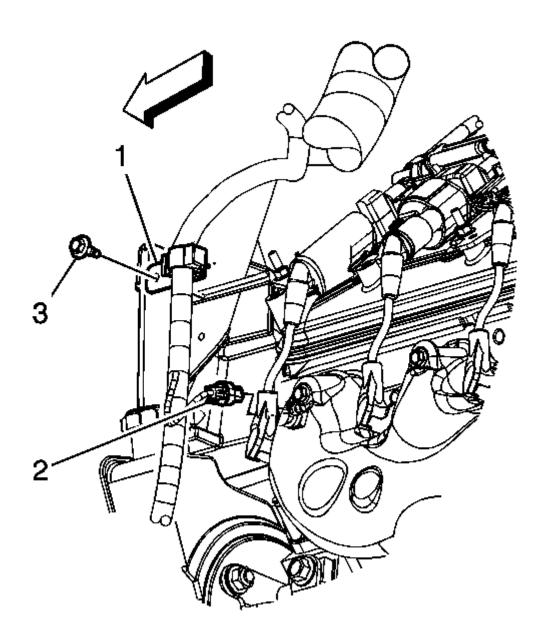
View Of Engine Wiring Harness, Clip, Bolt & Connector Courtesy of GENERAL MOTORS CORP.
